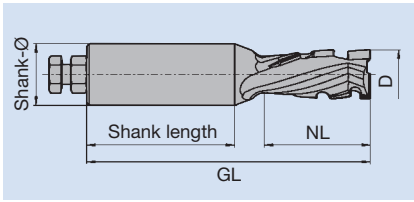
LH-RD negative twist, workpiece face side to top, supports workpiece clamping.
